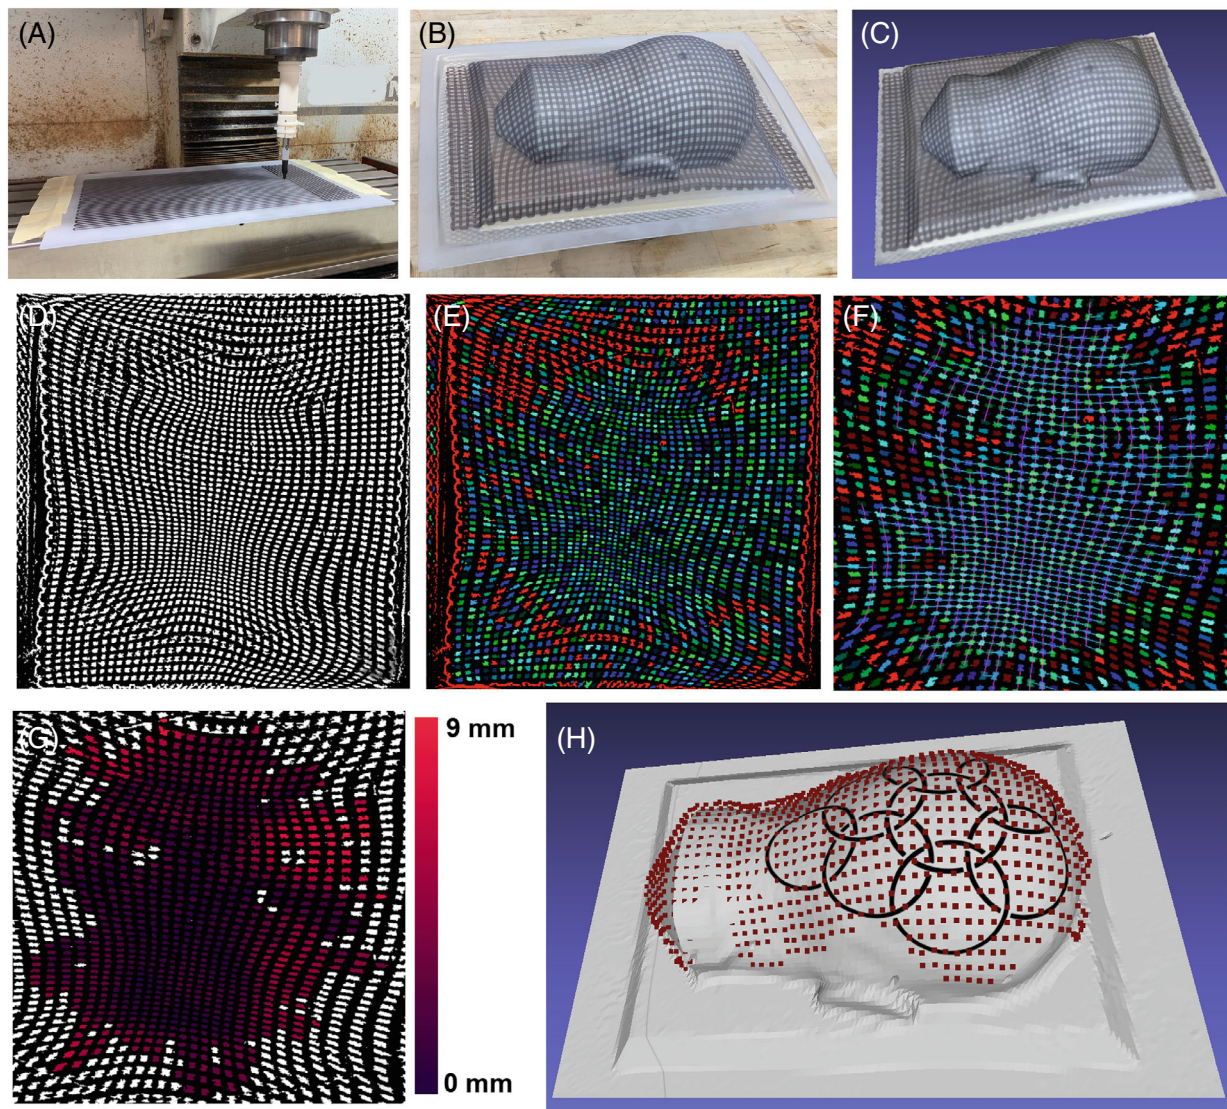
Verification of vacuum forming simulation. (A) Printing a grid on a flat polycarbonate sheet with our CNC milling machine. (B) A single image of the vacuum formed plastic to be used for photogrammetry. (C) Reconstructed three-dimensional (3D) model of the vacuum formed plastic with grid lines. (D) Flattened model texture. (E) Texture with labeled contours. Red indicates shapes which are filtered out due to being nonrectangular, and the remaining rectangles are colored a random mixture of blue and green to distinguish them from each other. (F) Re-forming the grid from adjacent rectangles, blue/purple lines indicate correct grid lines. (G) Relative error of squares where connectivity succeeded, darker purple indicates lower error while brighter red indicates higher error. The dimensions of the plastic substrate are 280 mm × 432 mm. The maximum percentage error with respect to the length is 2%. Error was not calculated for the white squares due to the noise of the scan. (H) 3D reconstruction of scanned grid points shown in red and overlaid on a simulated model of a vacuum formed sheet.
